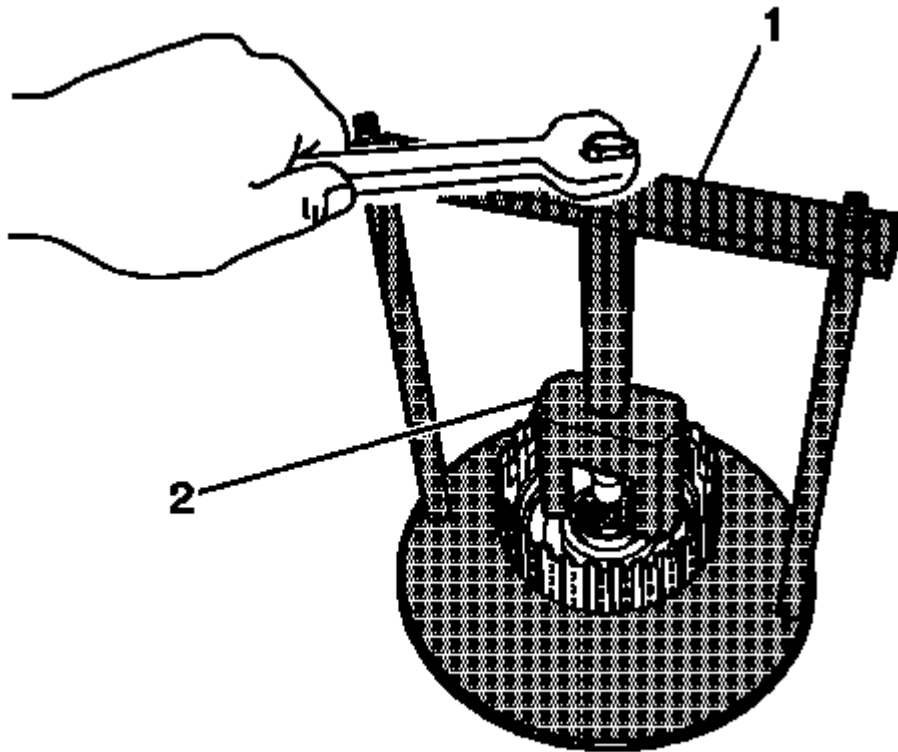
Compressing Spring Using DT 46451 & DT 46452
